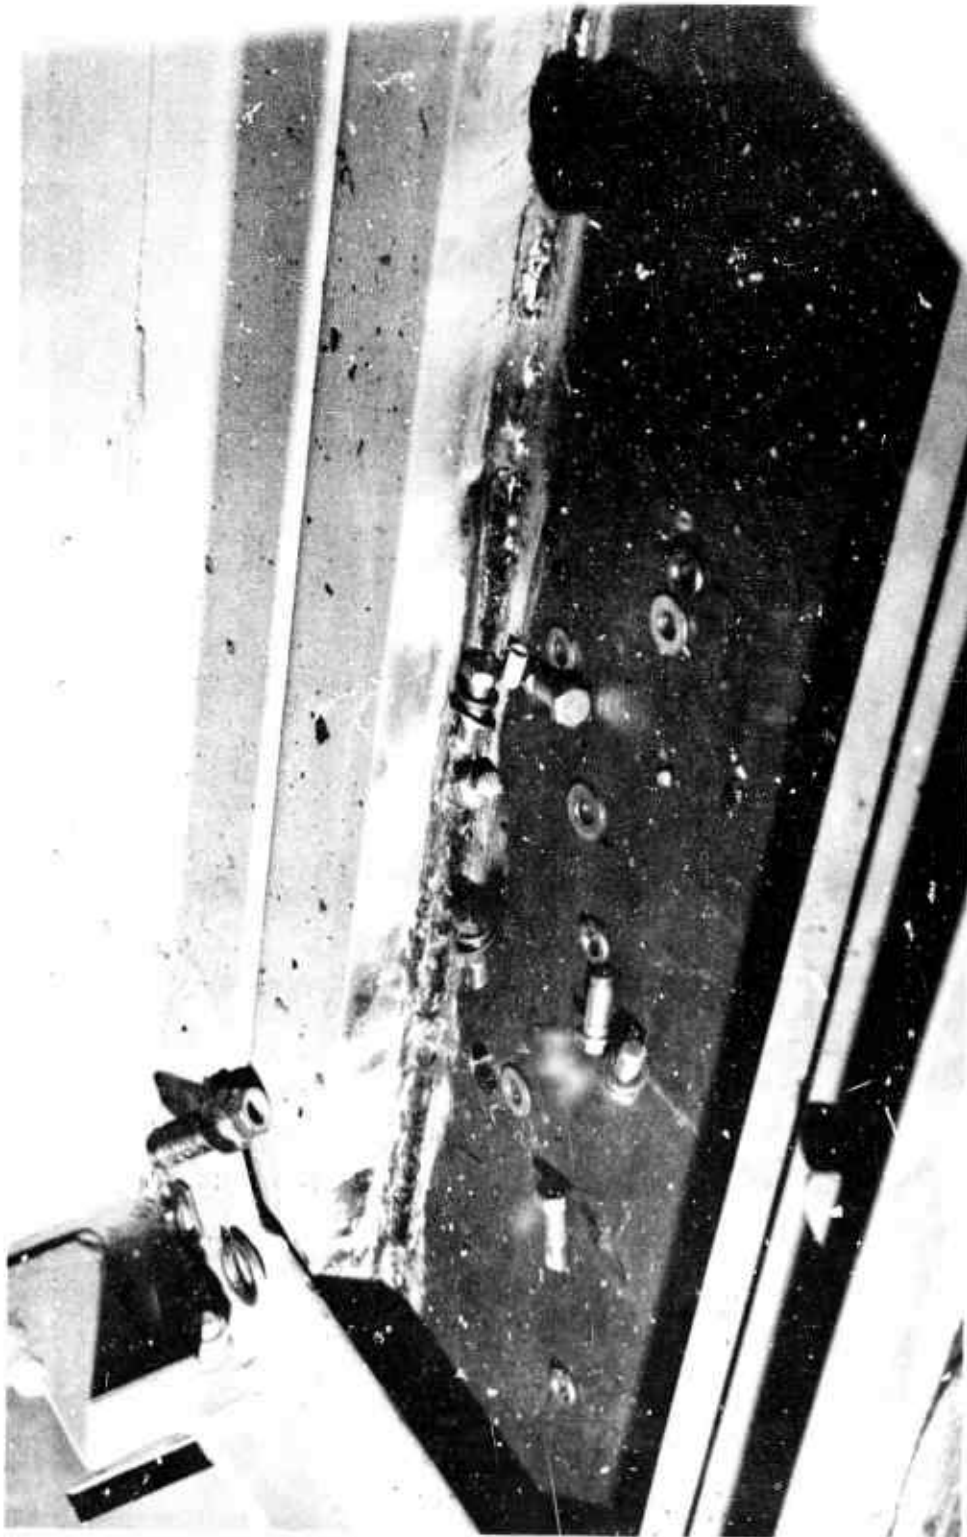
Damage from Vertical Shock - 2400 A Breaker Bay (Rear). The smaller bolts were the support bolts for the melamine board. The large bolt at upper left was a switchgear hold-down bolt which was stripped out of the hole in the corner.
